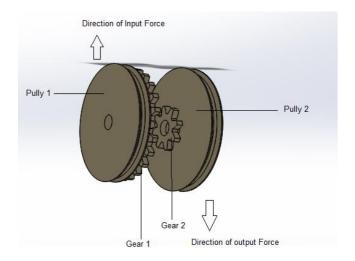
The Larger Driver Gear (right) and The smaller Driven Gear (right)
